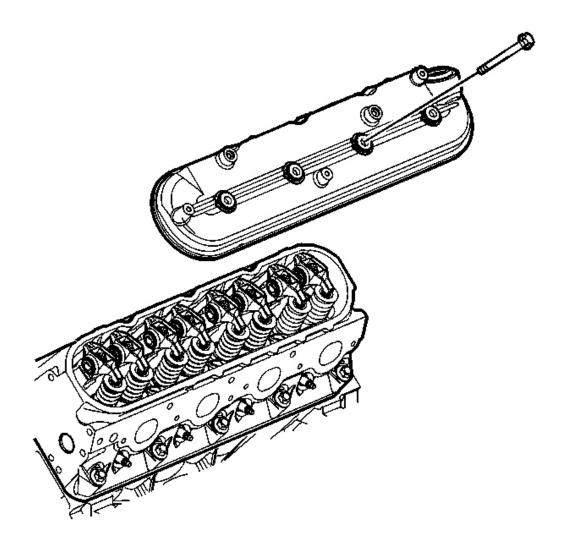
Valve Cover To Cylinder Head View Courtesy of GENERAL MOTORS CORP.
